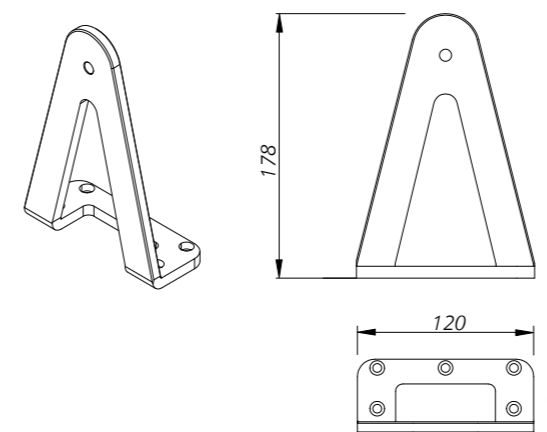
Bottom bracket for mounting type G spindle actuator on the smoke exhaust window, dimensions [mm]
